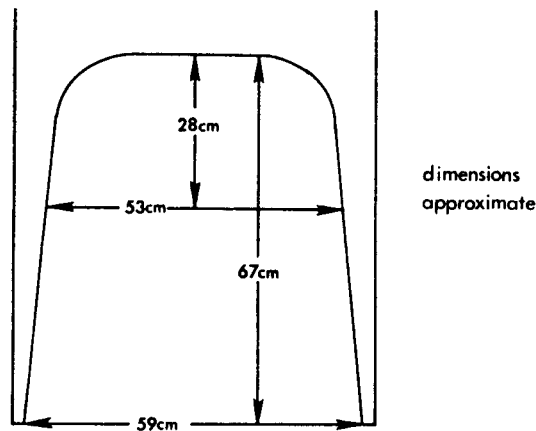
FIGURE B. Throat Dimensions of RotoSaw Buncher Head.
